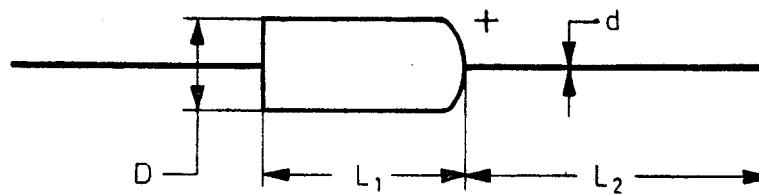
OUTLINE DRAWING AND DIMENSIONS
